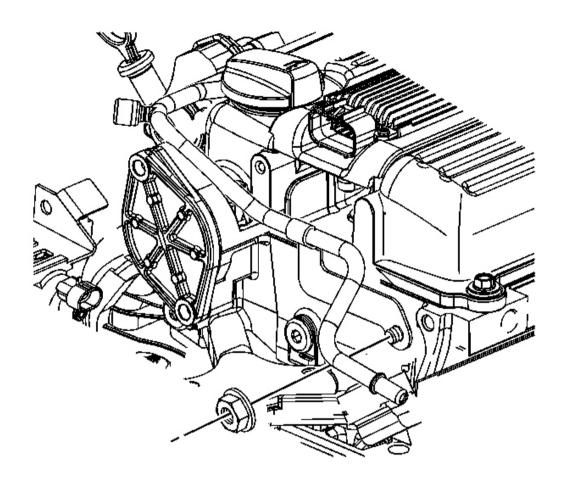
View Of Fuel Rail Bracket Courtesy of GENERAL MOTORS CORP.
